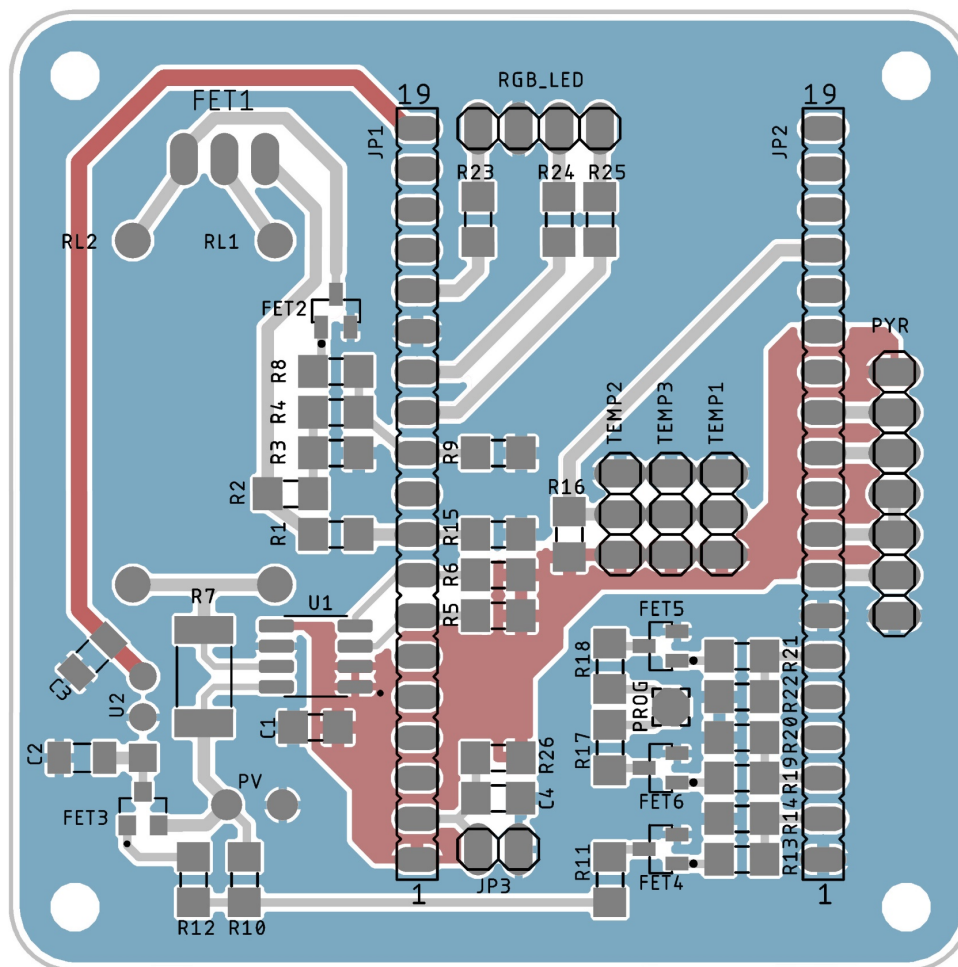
PCB layout of the main circuit with the copper layer, soldermask, and silkscreen
